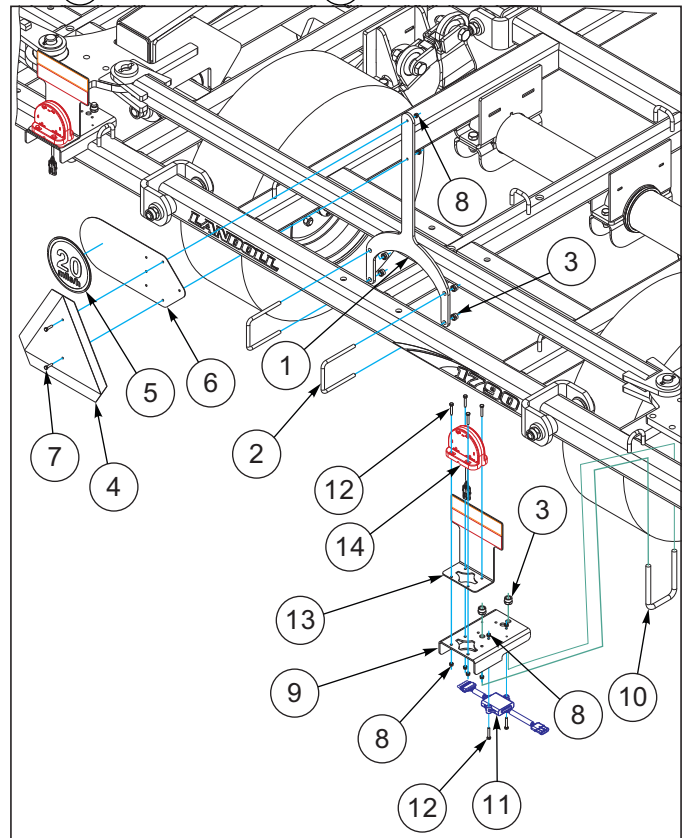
Rear Light Bracket Assembly 1770, 1790, 1710
